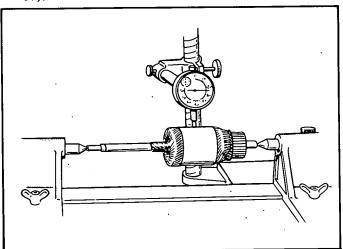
CHECKING ARMATURE SHAFT RUNOUT
